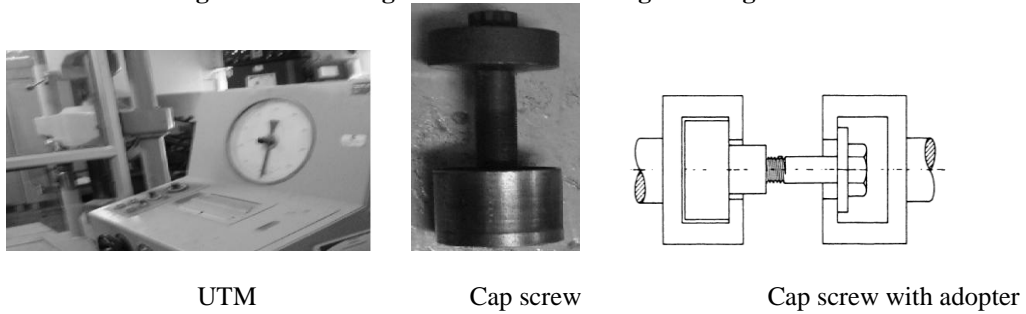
Ultimate tensile testing machine and cap screw with adpoter
